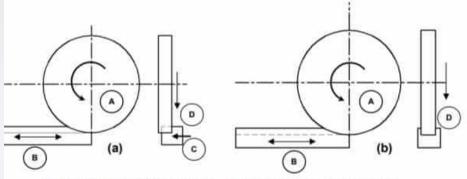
Horizontal spindle reciprocating table surface grinder
